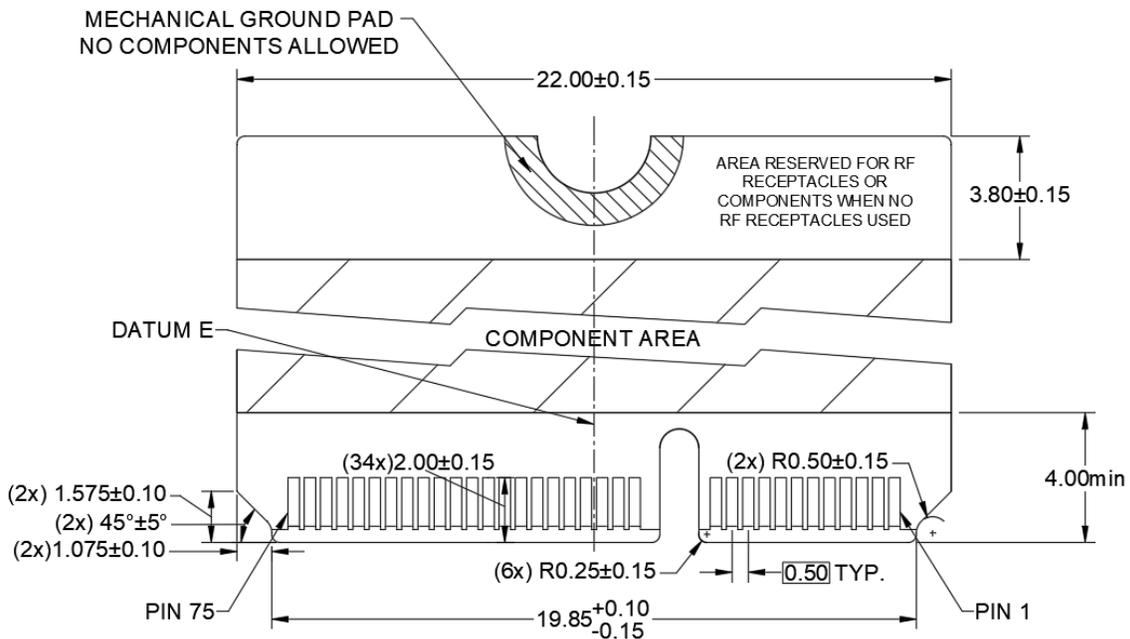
M.2 22XXX-XX-X-1A(A) Card Edge Outline Top-side
